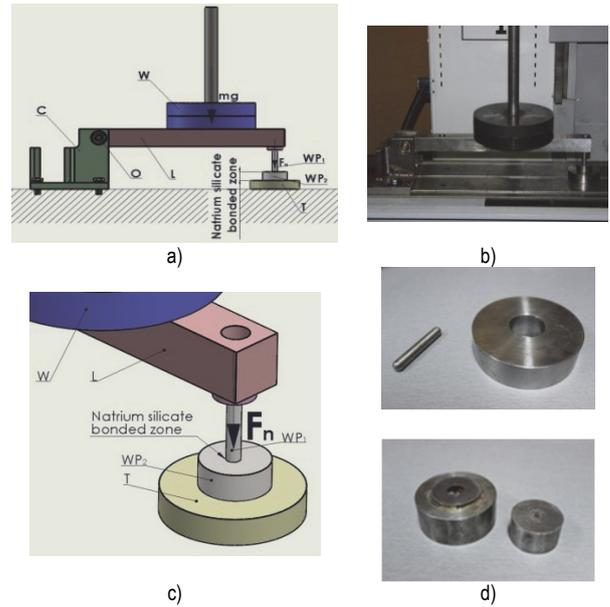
CAD model of purpose-built testing device (a); photographic representation of the device (b); CAD detail of the bond breaking zone under the action of tensile stress (c); photographic representation of the samples after breaking the bond (d)
